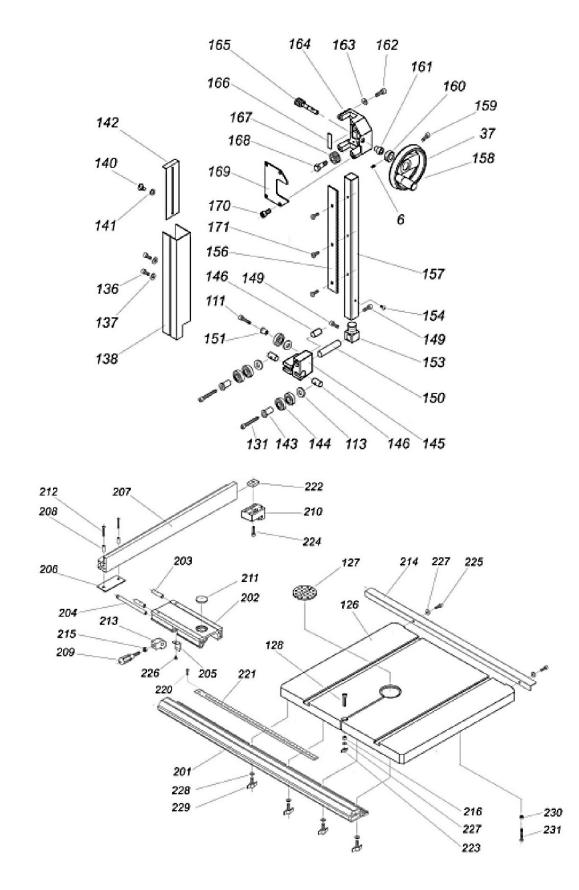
Spare parts drawing 3 - Wood Band Saw HBS 471 / HBS 473
